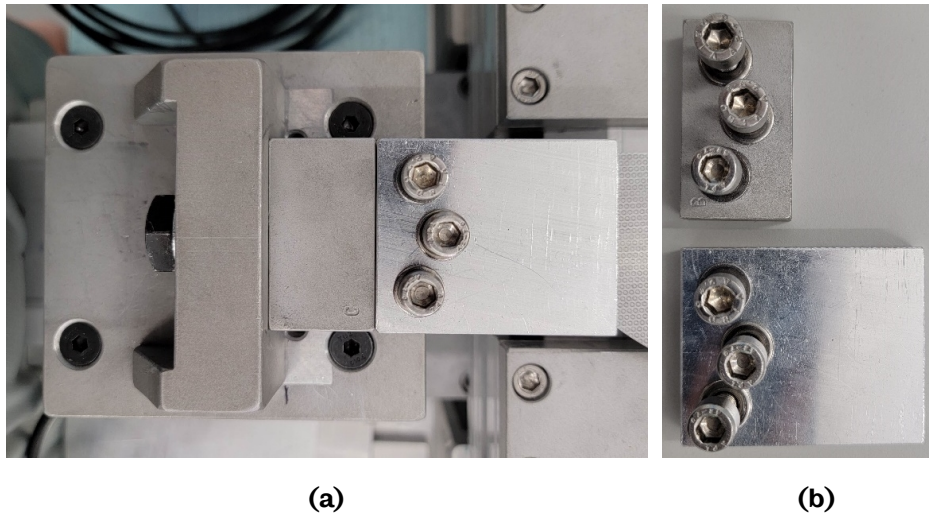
The original clamp with the clamp location adjusting screw and nuts.
